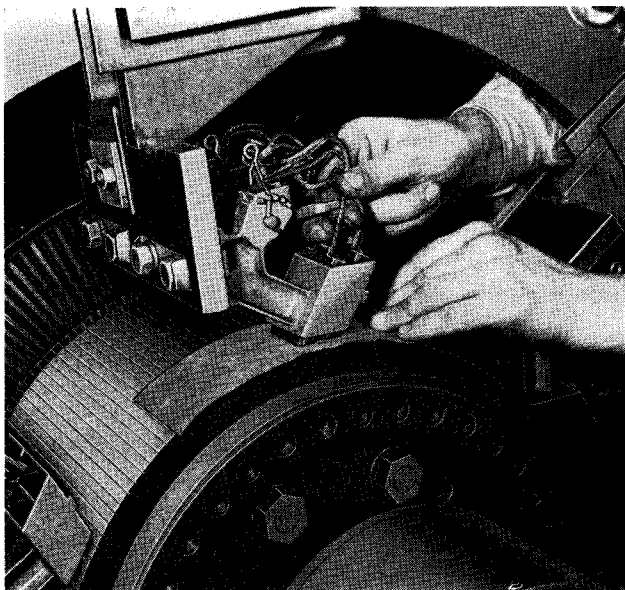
Method of Seating Brushes on D-C Generators and Motors
